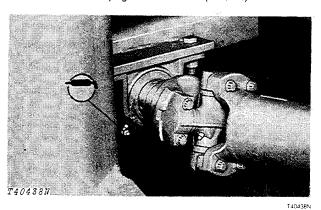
Lower Drive Shaft Support Bearing (1 Point)
